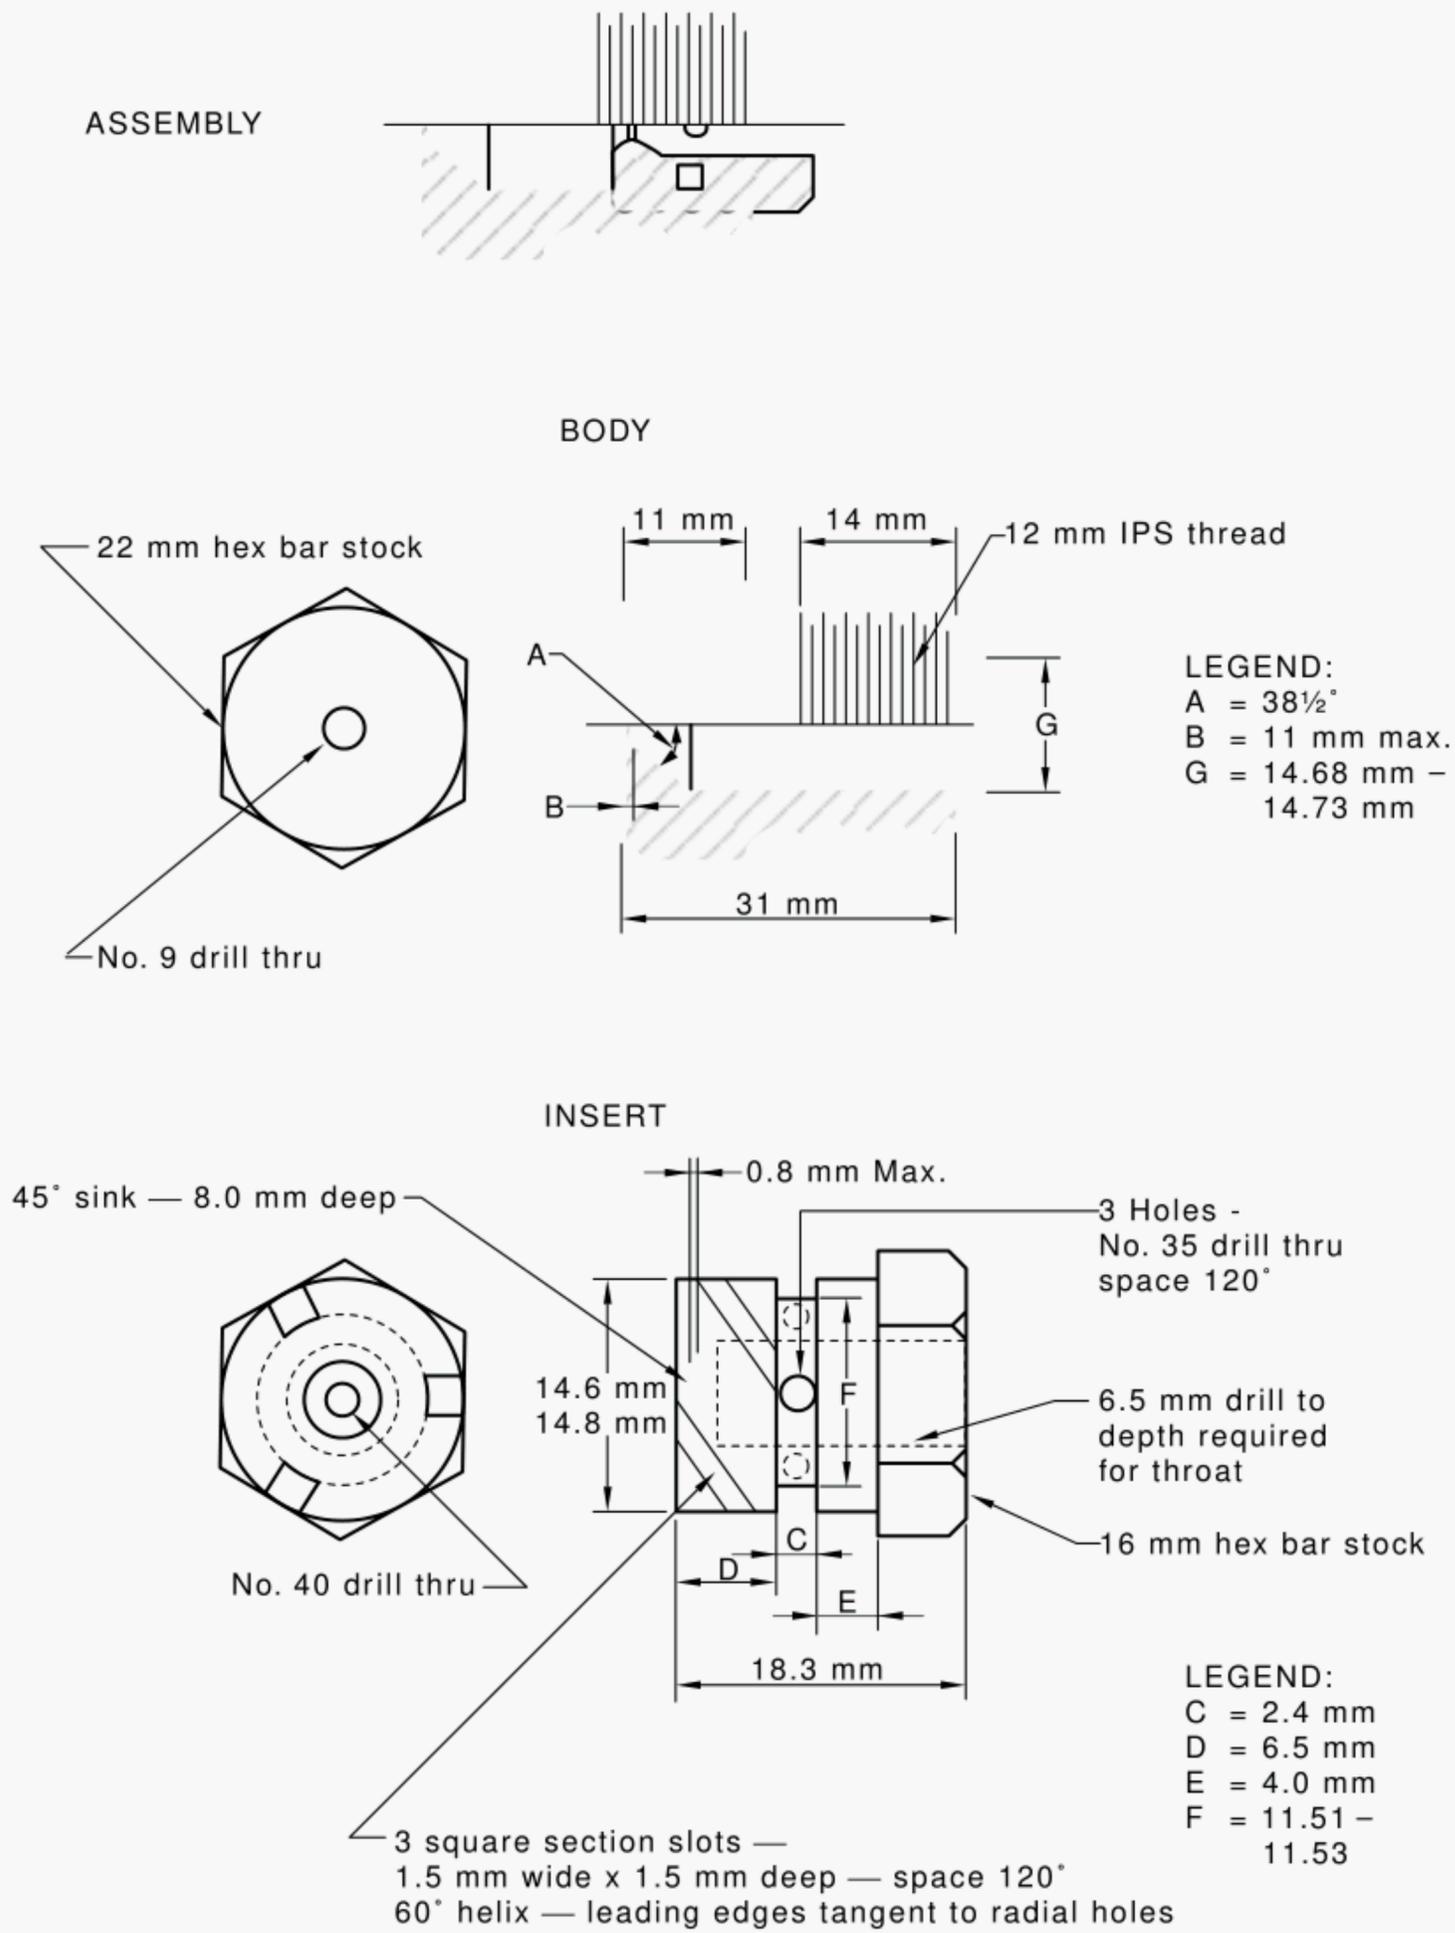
DETAIL OF RAIN TEST SPRAY HEAD
